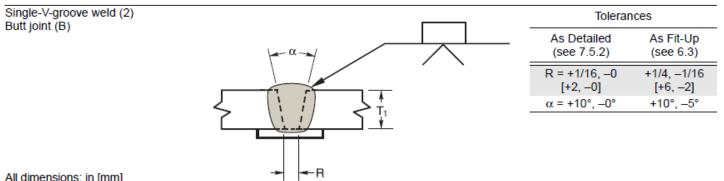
A—Prequalified Complete Joint Penetration (CJP) Groove Welded Joint Details
